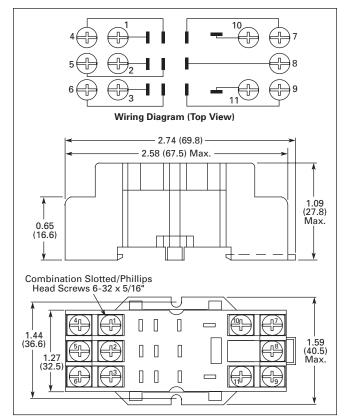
D7PA3 — Approximate Dimensions in Inches (mm)
